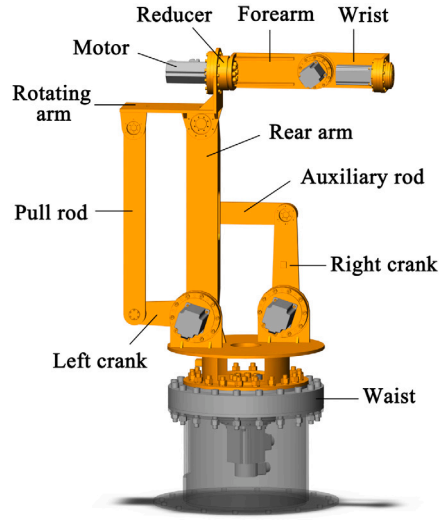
3D model of the hybrid welding manipulator.
